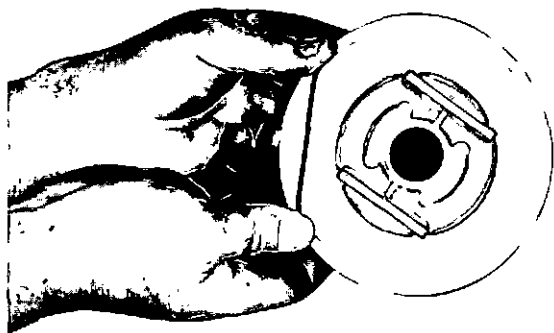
, (T3518). Installing O-ring onto the oil seal plate
